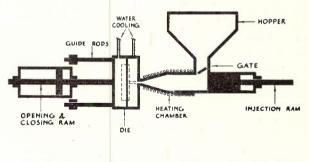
Schematic Diagram of Automatic Injection Moulding Machine.
